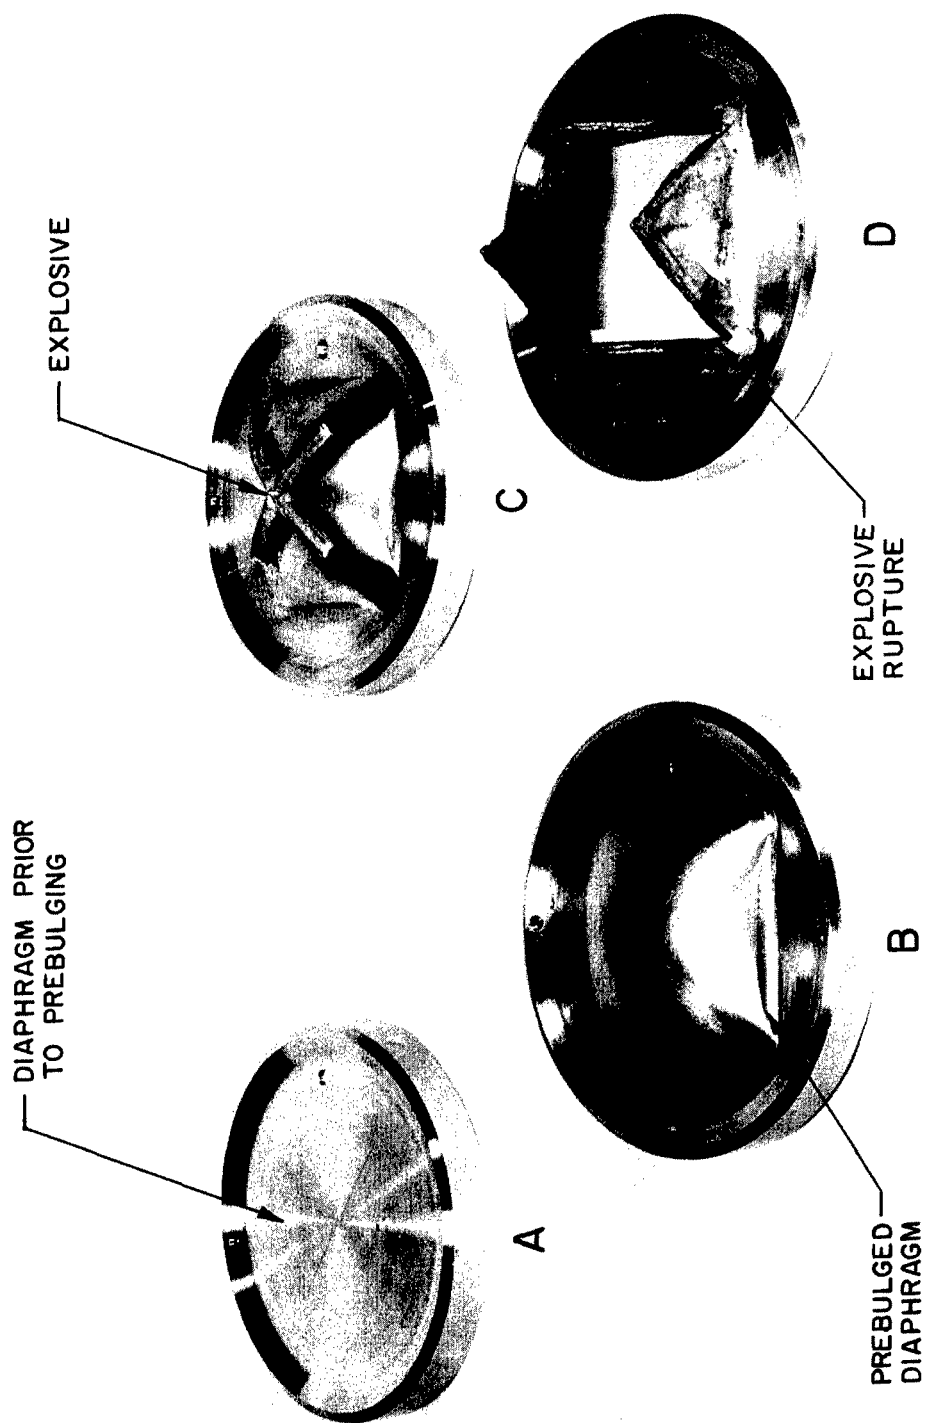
STEPS IN THE FABRICATION OF THE EXPLOSIVE HIGH PRESSURE RELEASE.
